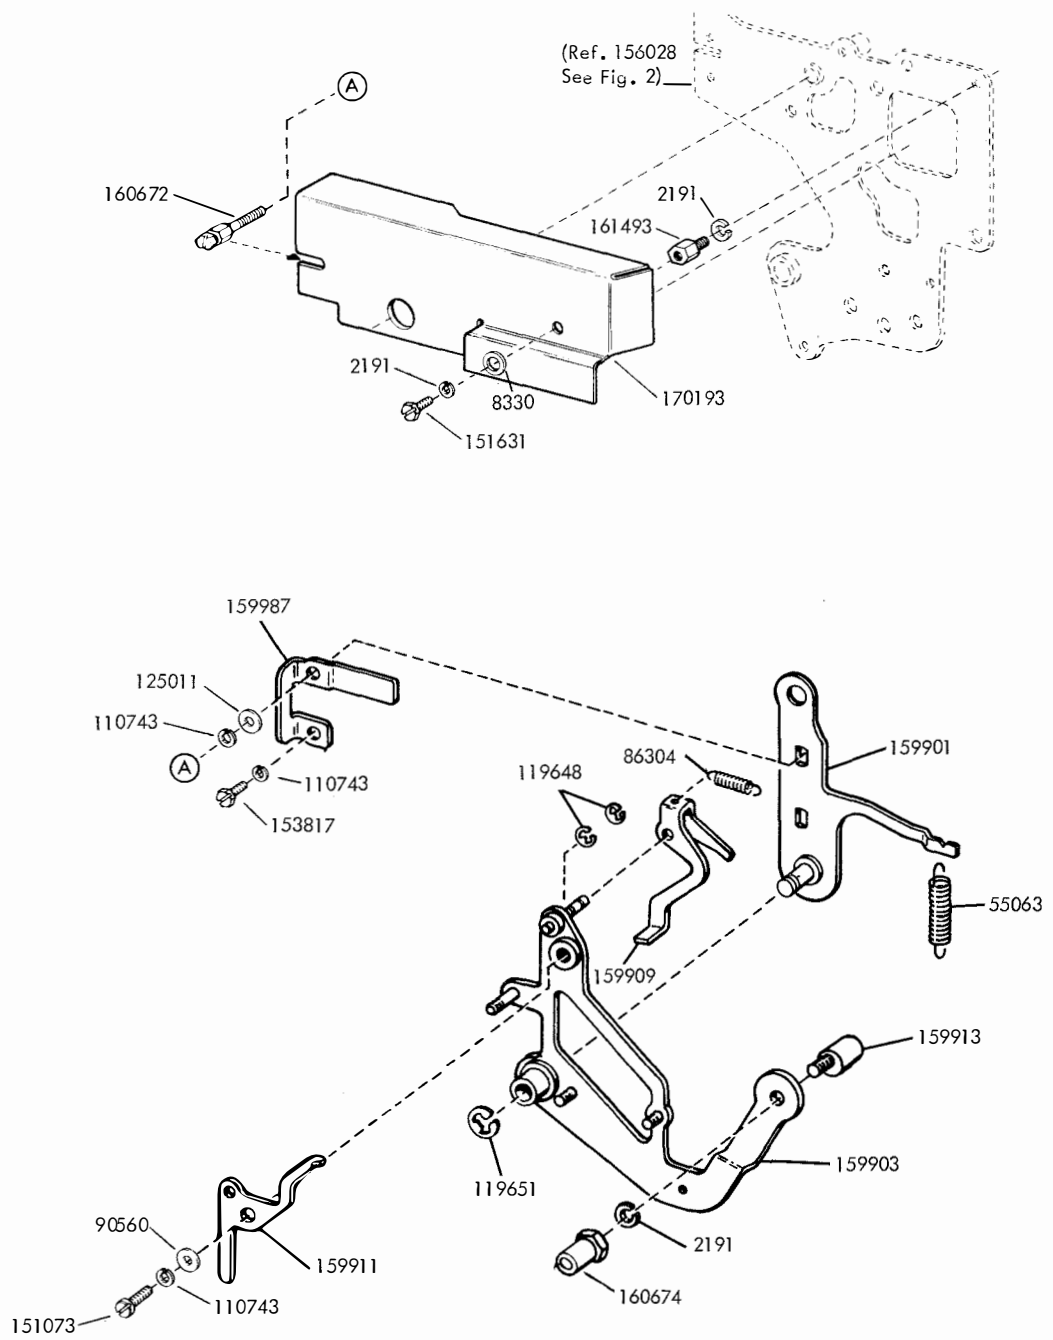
AUXILIARY CONTACT ASSEMBLIES
